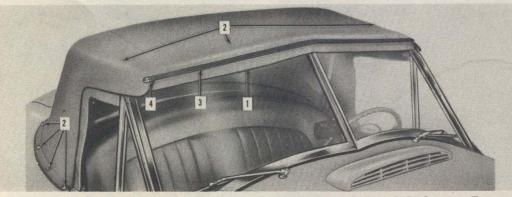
E-Top Covering and Back Curtain Assembly including Side Quarter Fasteners (Front View).
